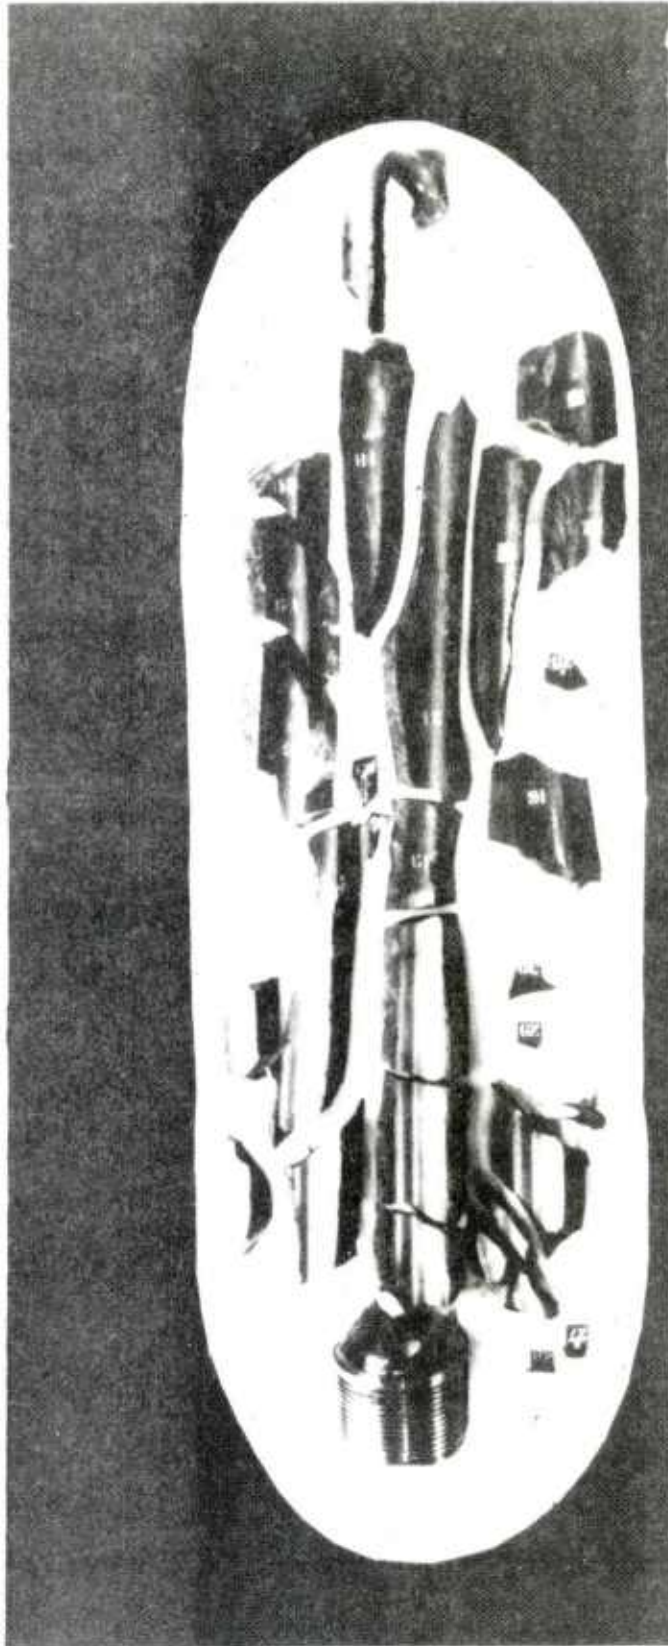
Fatigue Failure in Gun Tube. Fragments from brittle fracture produced by fatigue during firing tests of a developmental 175mm cannon tube.
